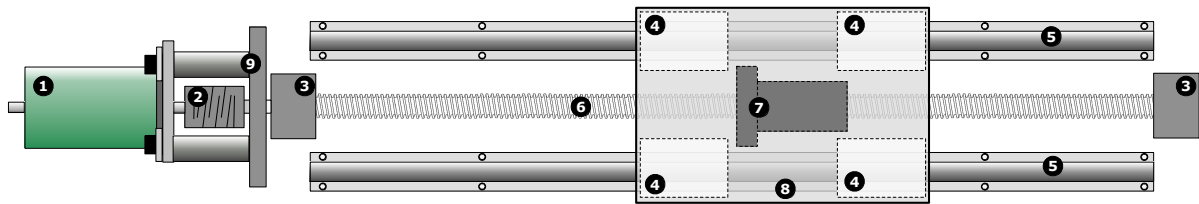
Linear motion actuator, top view: ① stepper motor, ② flexible shaft-coupler, ③ ball screw bearing-blocks, ④ linear bearings, ⑤ linear rails, ⑥ ball screw, ⑦ ball nut, ⑧ carriage, ⑨ stepper motor mount.
